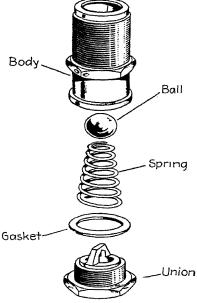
Valve assembly. Hydraulic-pump suction-line disconnect. (Courtesy of Douglas Aircraft Co.)
